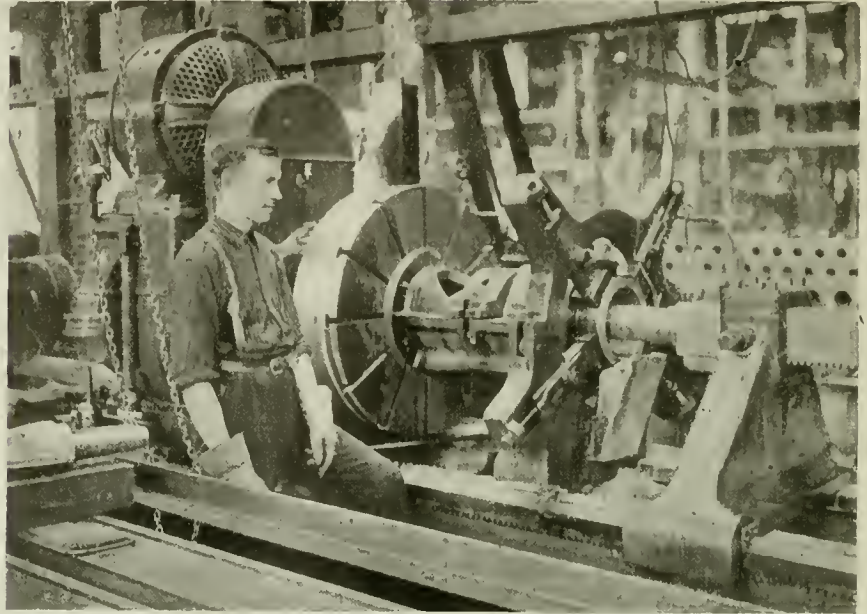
MACHINING INTERIOR COMPLETE IN SPECIAL BORING LATHE.
